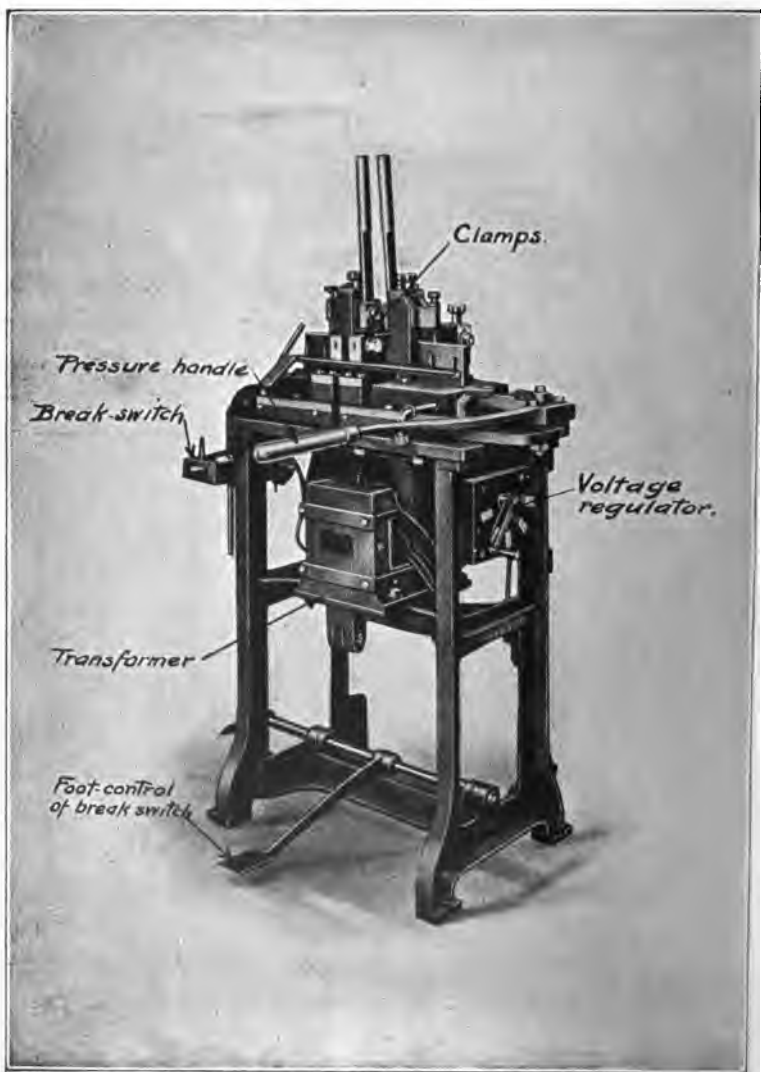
THOMSON BUTT-WELDING MACHINE
